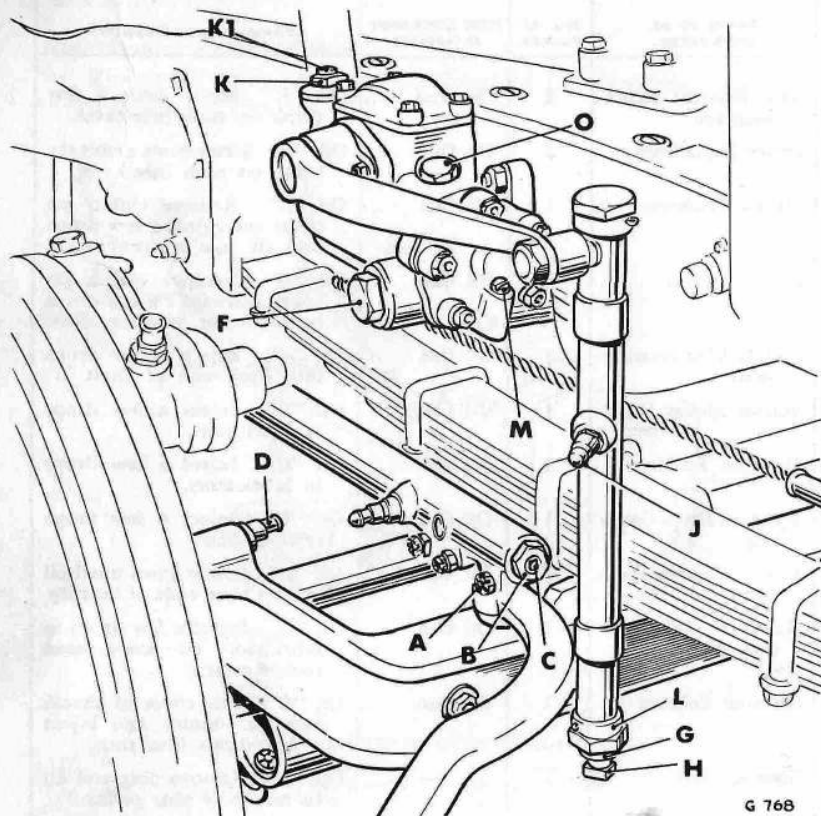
FRONT HYDRAULIC SHOCK DAMPER AND FRONT END OF SIDE STEERING TUBE.
